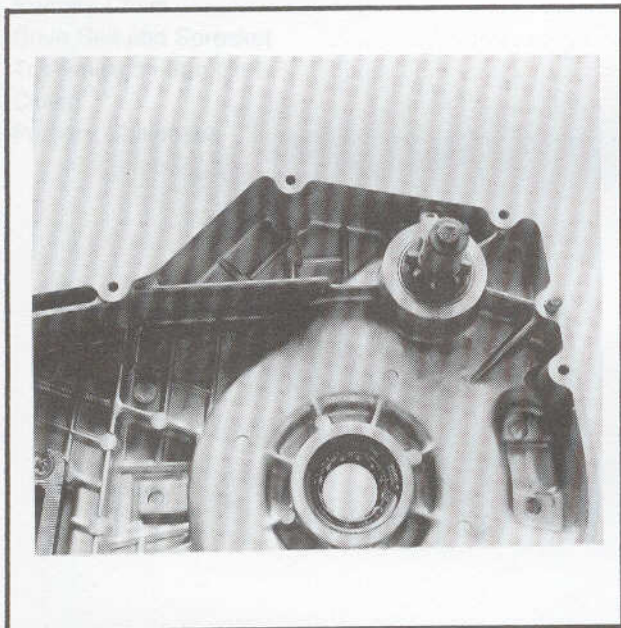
Primary Chaincase & Jackshaft Ass'y
